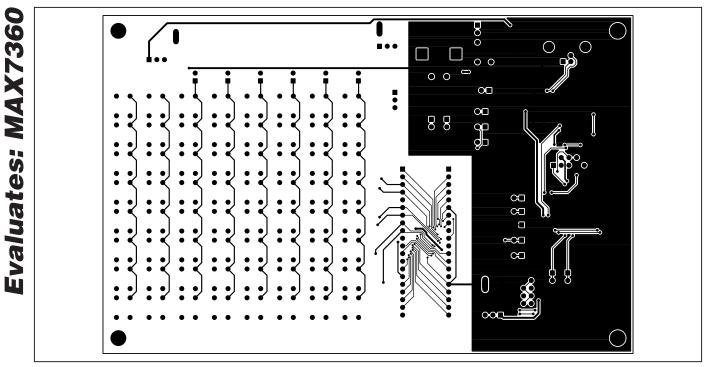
MAX7360 EV Kit PCB Layout—Component Side
